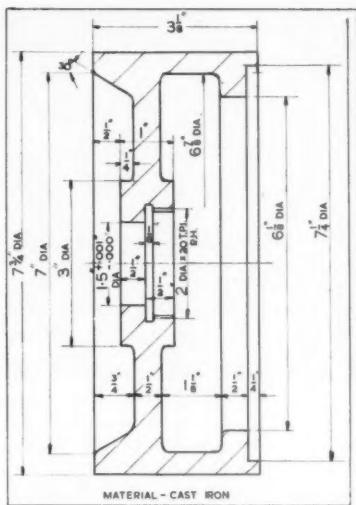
Pulley type castings having a short bore are typical examples where this class of equipment will find a ready use. The secondary process is essential because of the tapered portion seen at the left.
